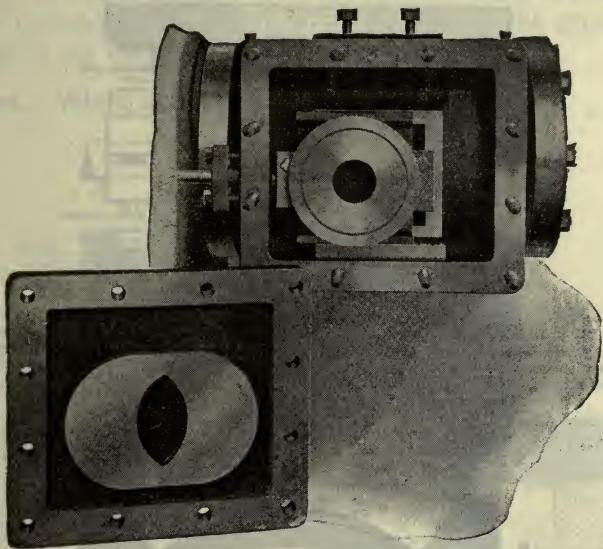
Cylinder of Houston, Stanwood and Gamble automatic engine with valve chest cover removed showing balanced slide valve. Fig. 356 shows a sectional view of this valve.
